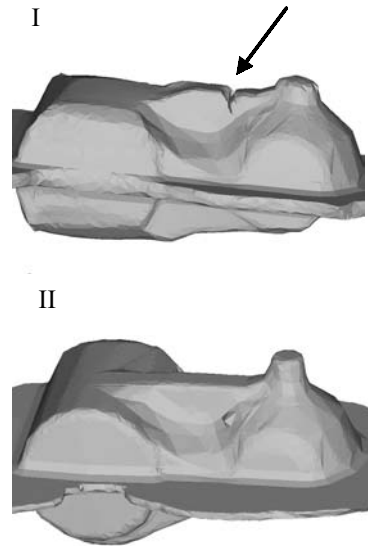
A forging with overlapping (case I) and a forging without any defect (case II)
